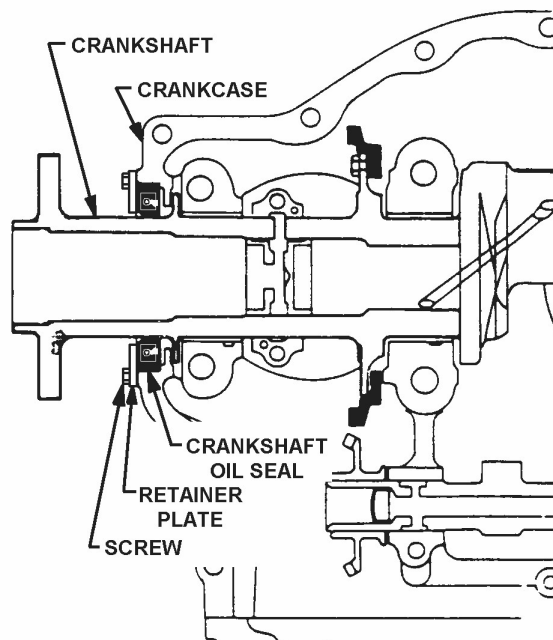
Retainer Plate and Screws on Front of Crankcase
